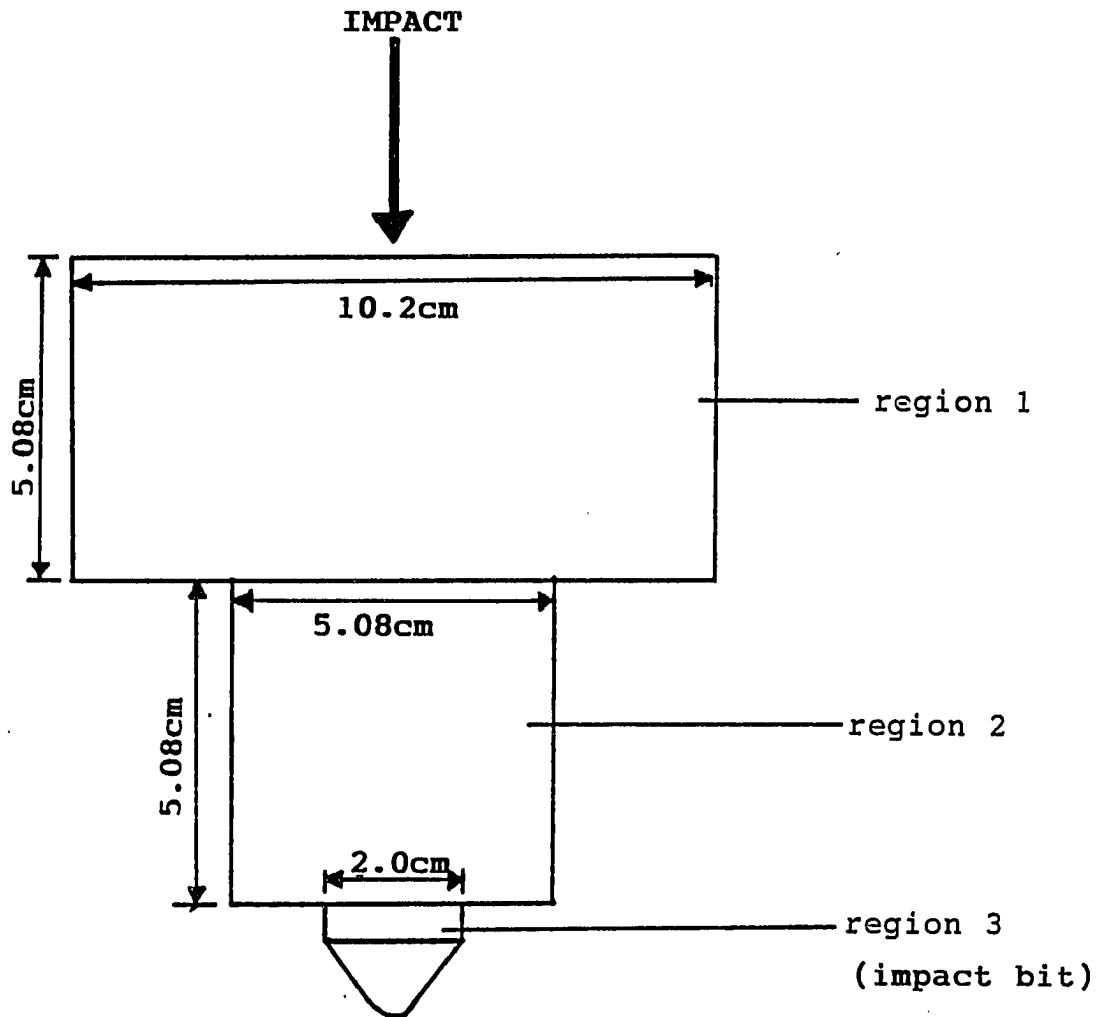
Impact bit holder for the Rock Fracture Hammer (RFH)
